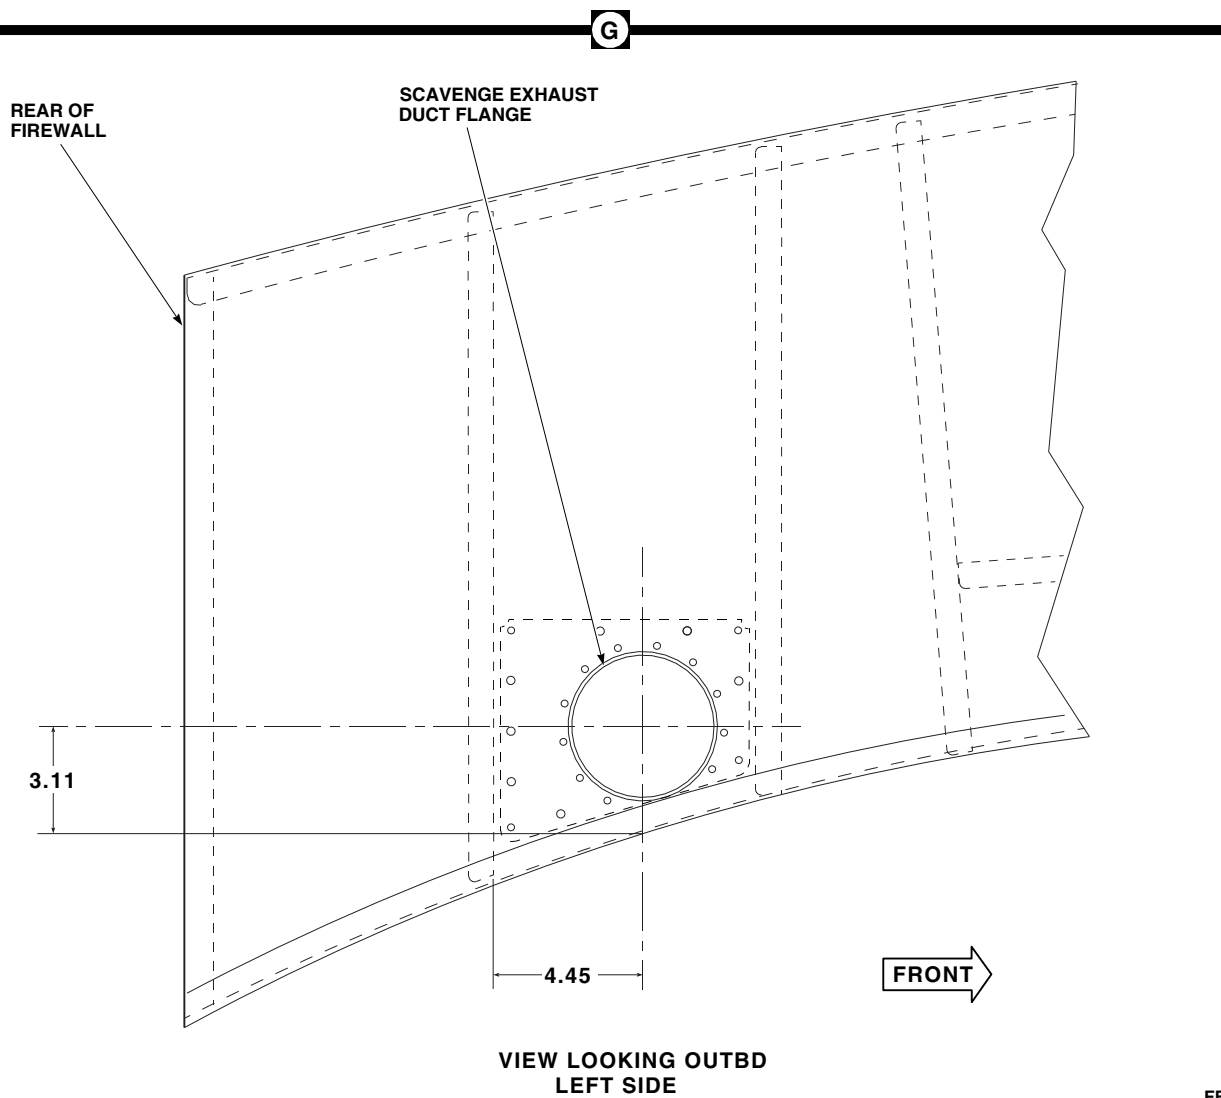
INSTALL APU ENGINE AIR PARTICLE SEPARATOR (EAPS) KIT
